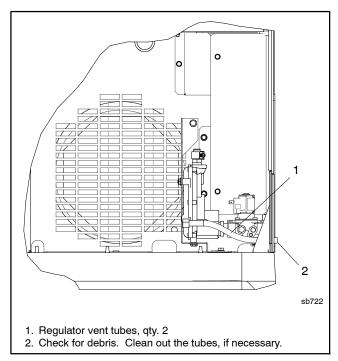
Fuel Regulator Vent Tubes (if equipped)
